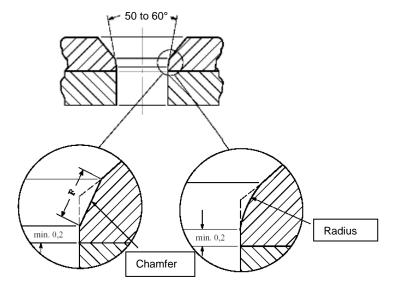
Transition radius / chamfer at the intersection between the hole countersink and bore and cylindrical thickness.
